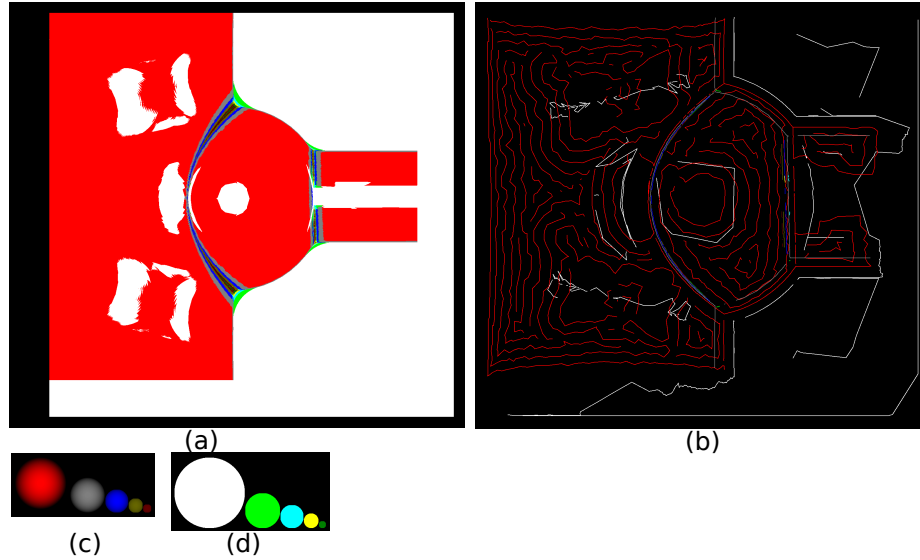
Milling zones (a) and generated tool paths for these zones (b) using five ball-end cutters (c) and five flat-end cutters (d).
